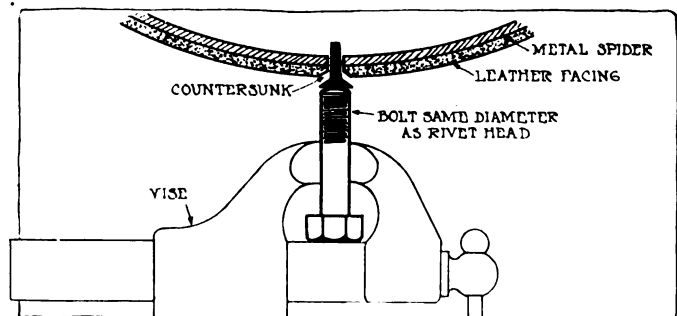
Use of a bolt to countersink the rivets into the holes in the leather
